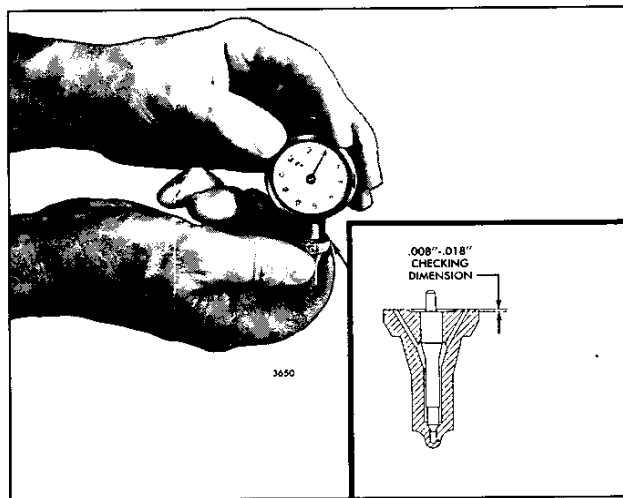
Checking Needle Valve Lift with Tool J 9462-02
